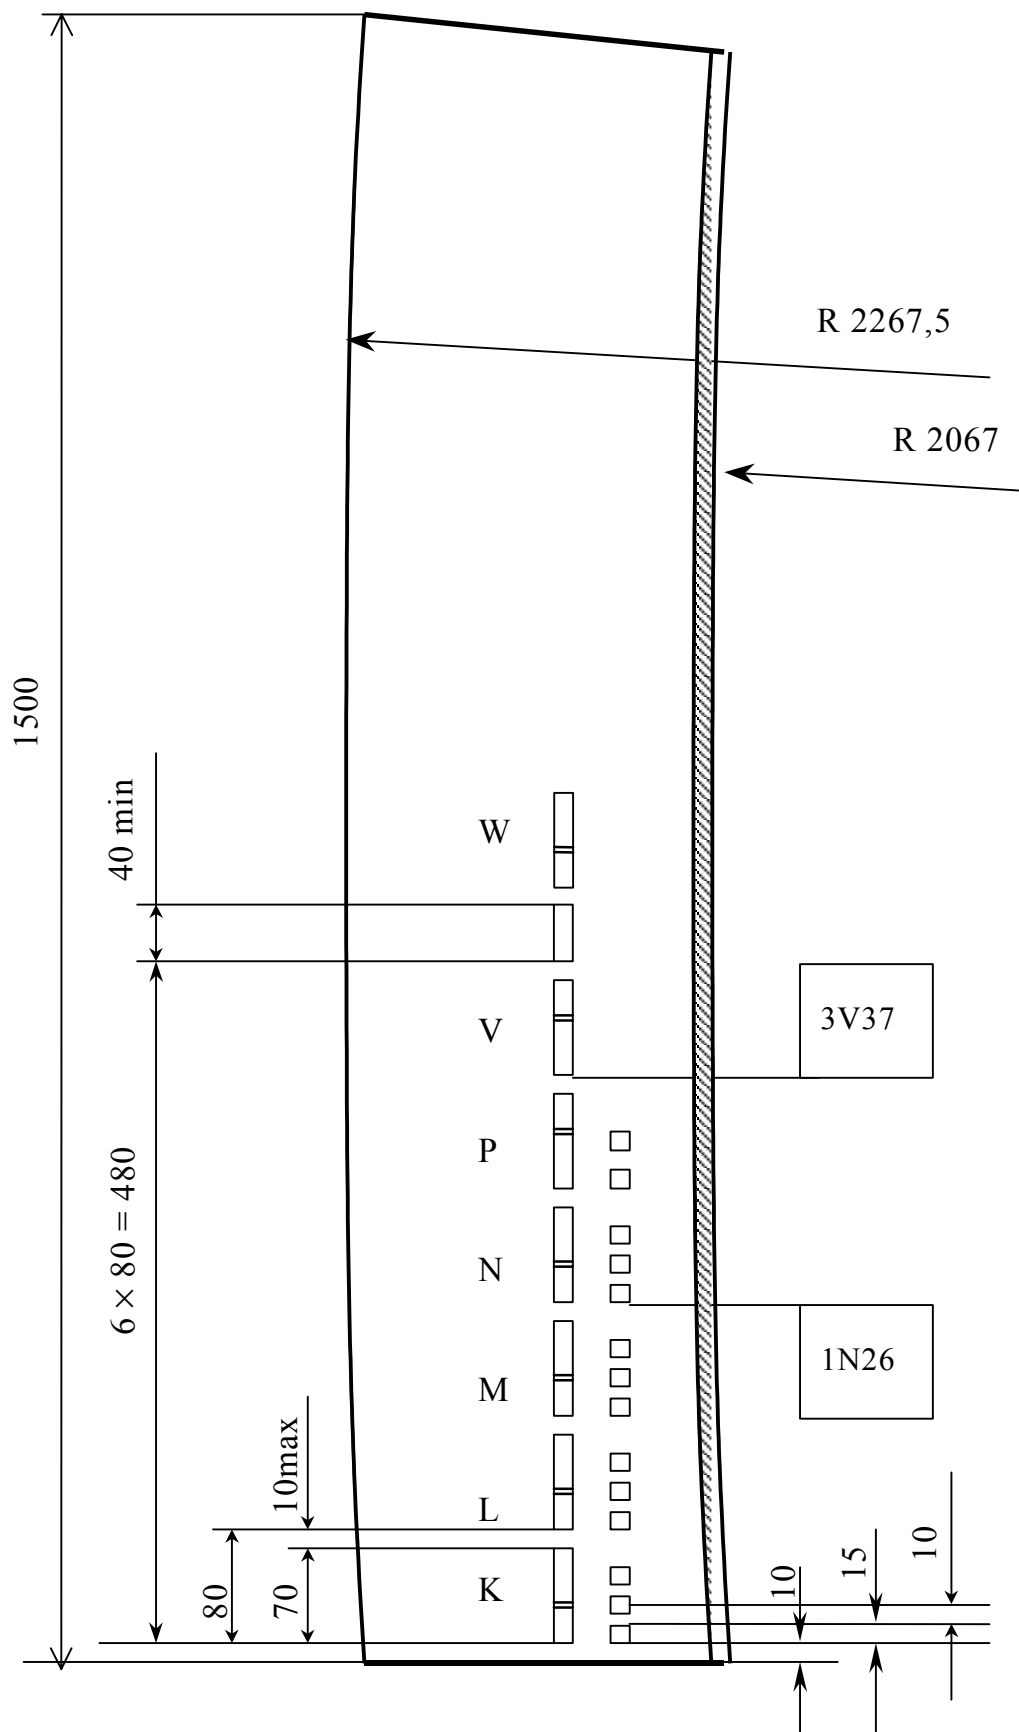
Horizontal cross-section (under the weld cross-section). Places of specimen cut off from base metal according to RCC-M (1N26,...) and GOST 9454-78 (3V37,...). Areas of specimen cut off K, L, M, N, P, V.
